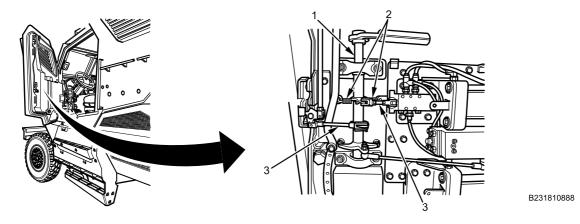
Inner Door Latch Handle Shaft in Neutral Position.
